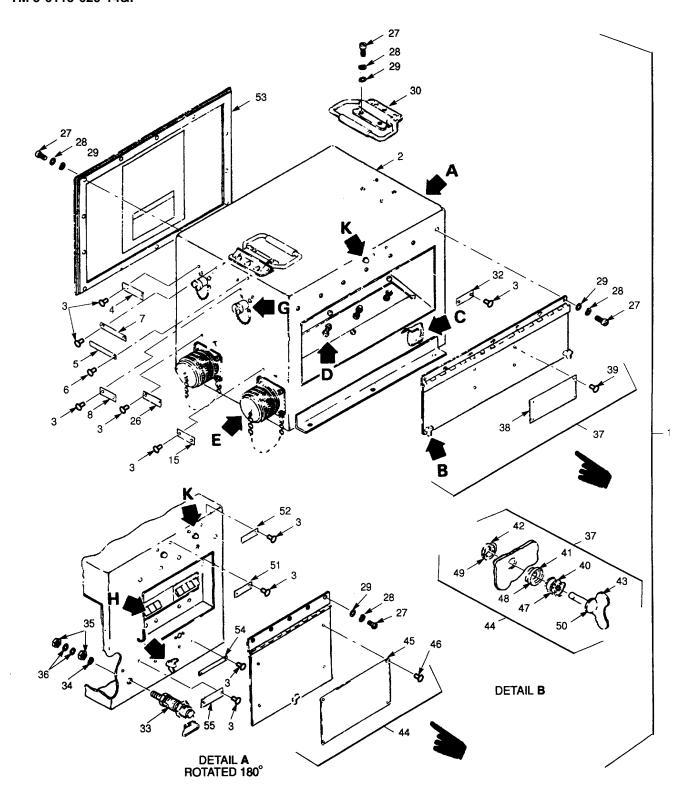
Five-Wire Switch Box Assembly (Sheet 1 of 3).
